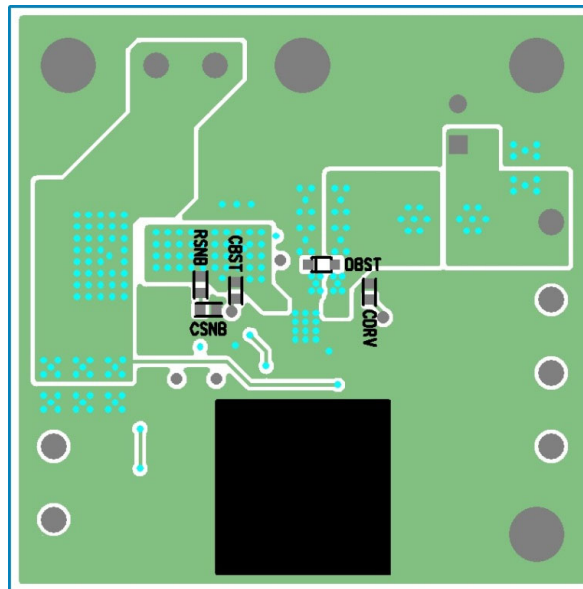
NCV891334MW50GEVB PCB Layout – Bottom
